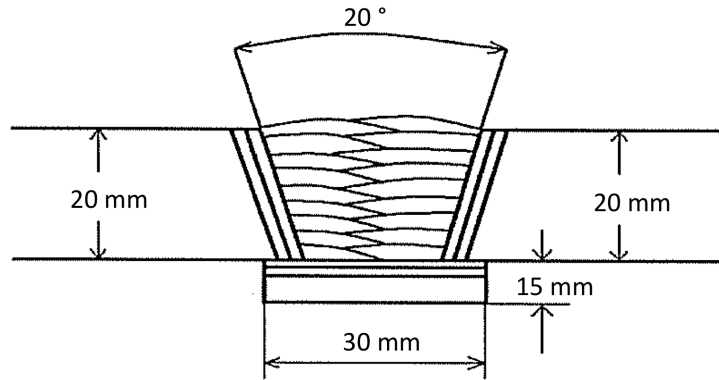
Schematic cross-section of the 18-pass weld used to produce the undiluted specimens of LTT-1 and LTT-2. The initial buttered layers are represented by the near vertical lines that follow the incline of the base plate faces [114].
